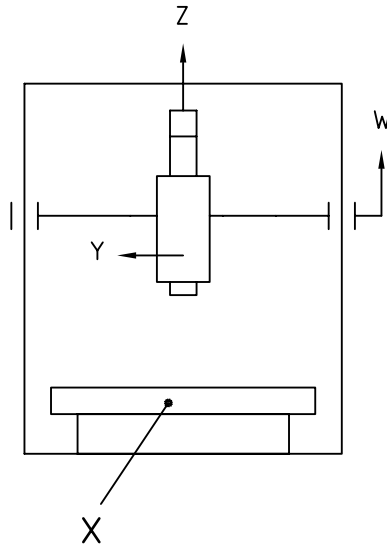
Type 3: Machine with one milling head on the cross-rail
